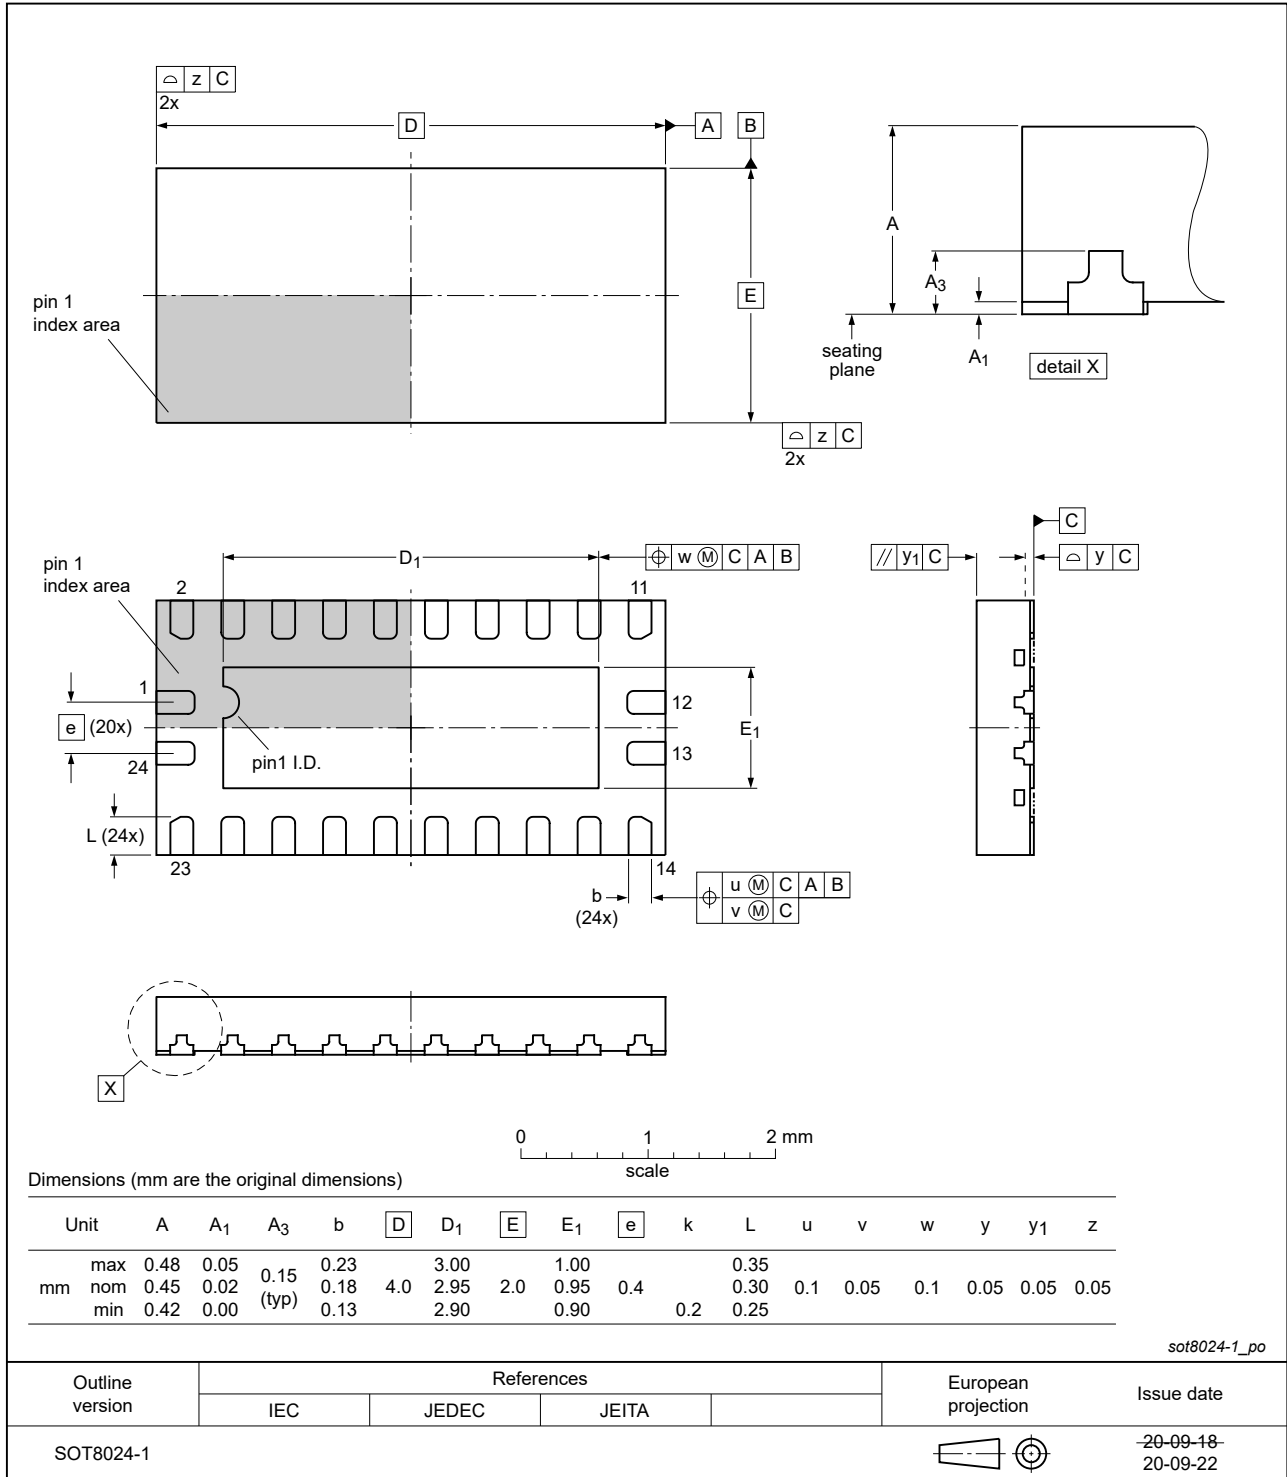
Package outline SOT8024-1 (DHXQFN24)
